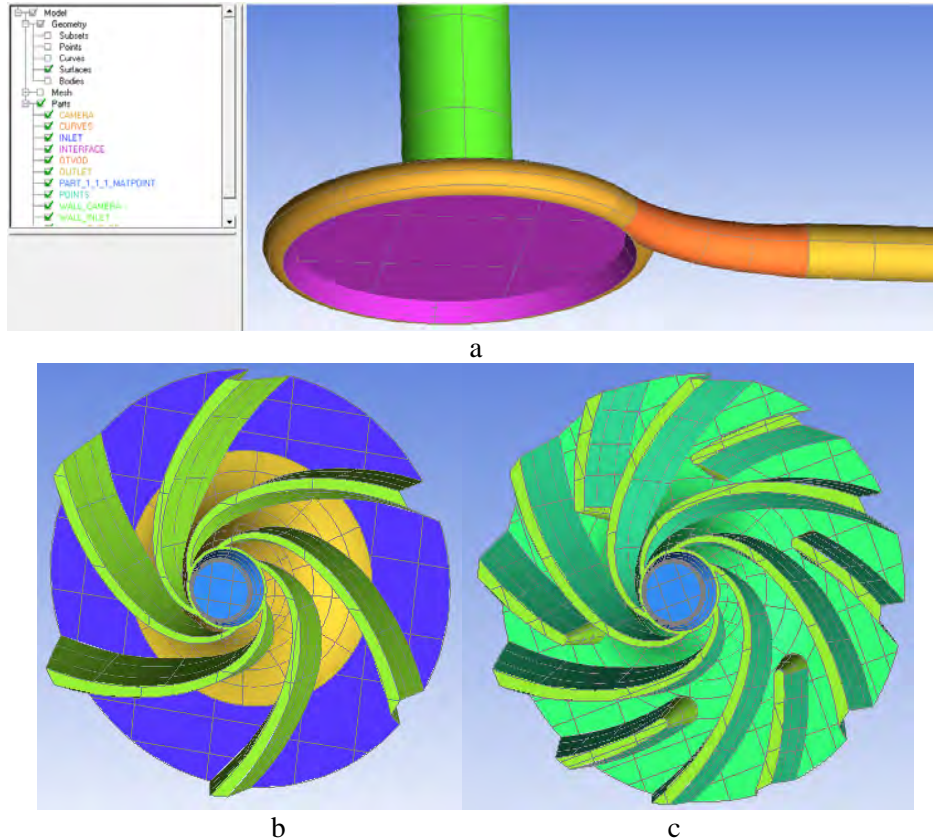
Three-dimensional models of the flow passage of the investigated SVN 80-32 pump: a – stator element; b, c – rotor element
